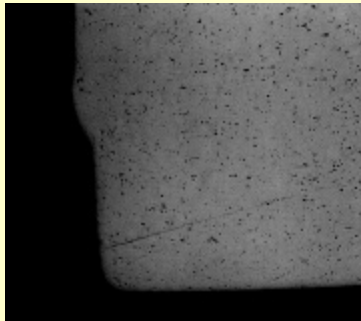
Bulge found in Sabot No. 72B outside wall, 40x.
